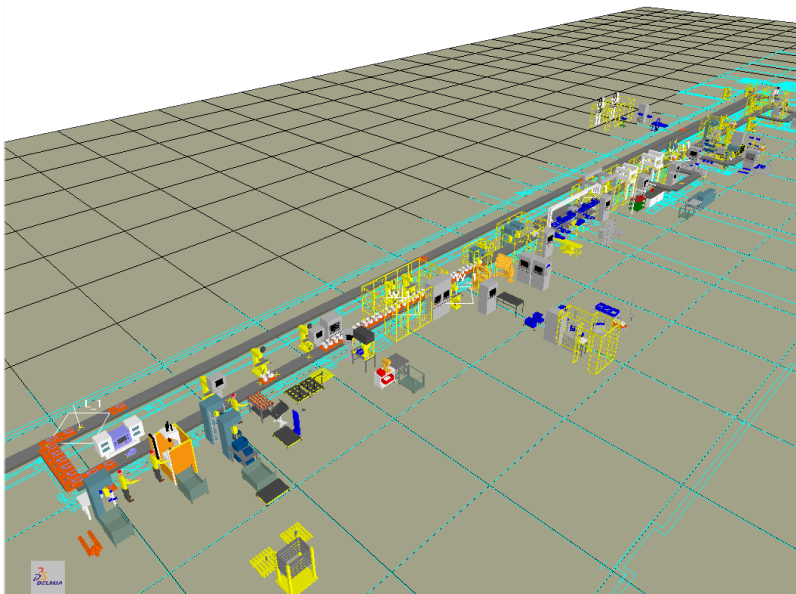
VW Slovakia – FMU of Gearbox Assembly Line [9]
